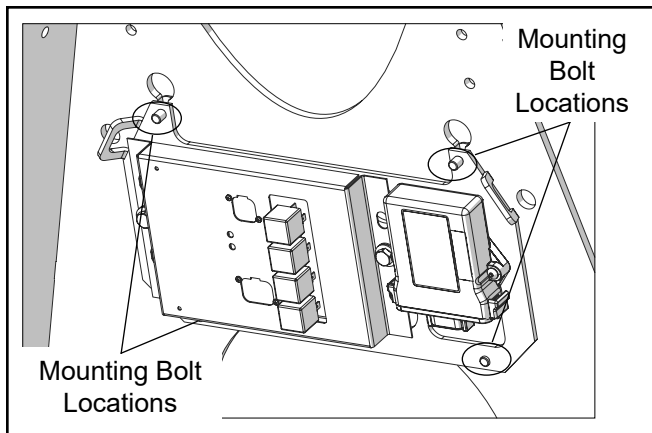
DM/DC Driver Board (Inside Pedestal)
